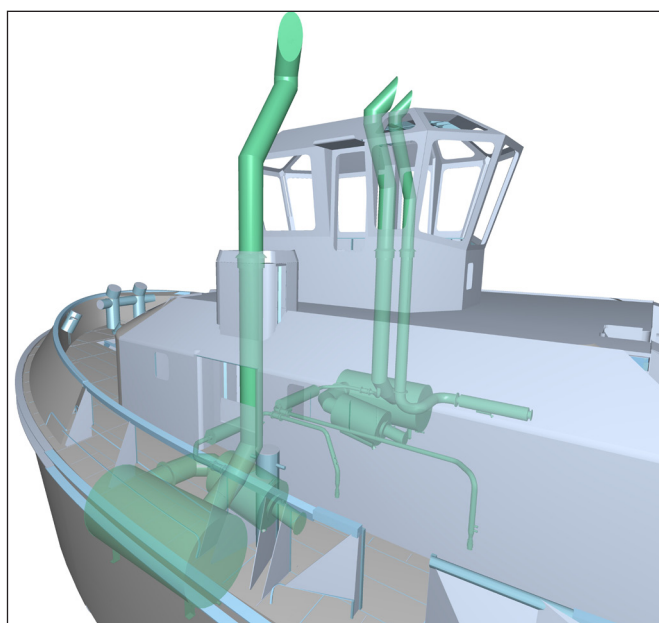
3D drawing exhaust systems of main and auxiliary engines.
